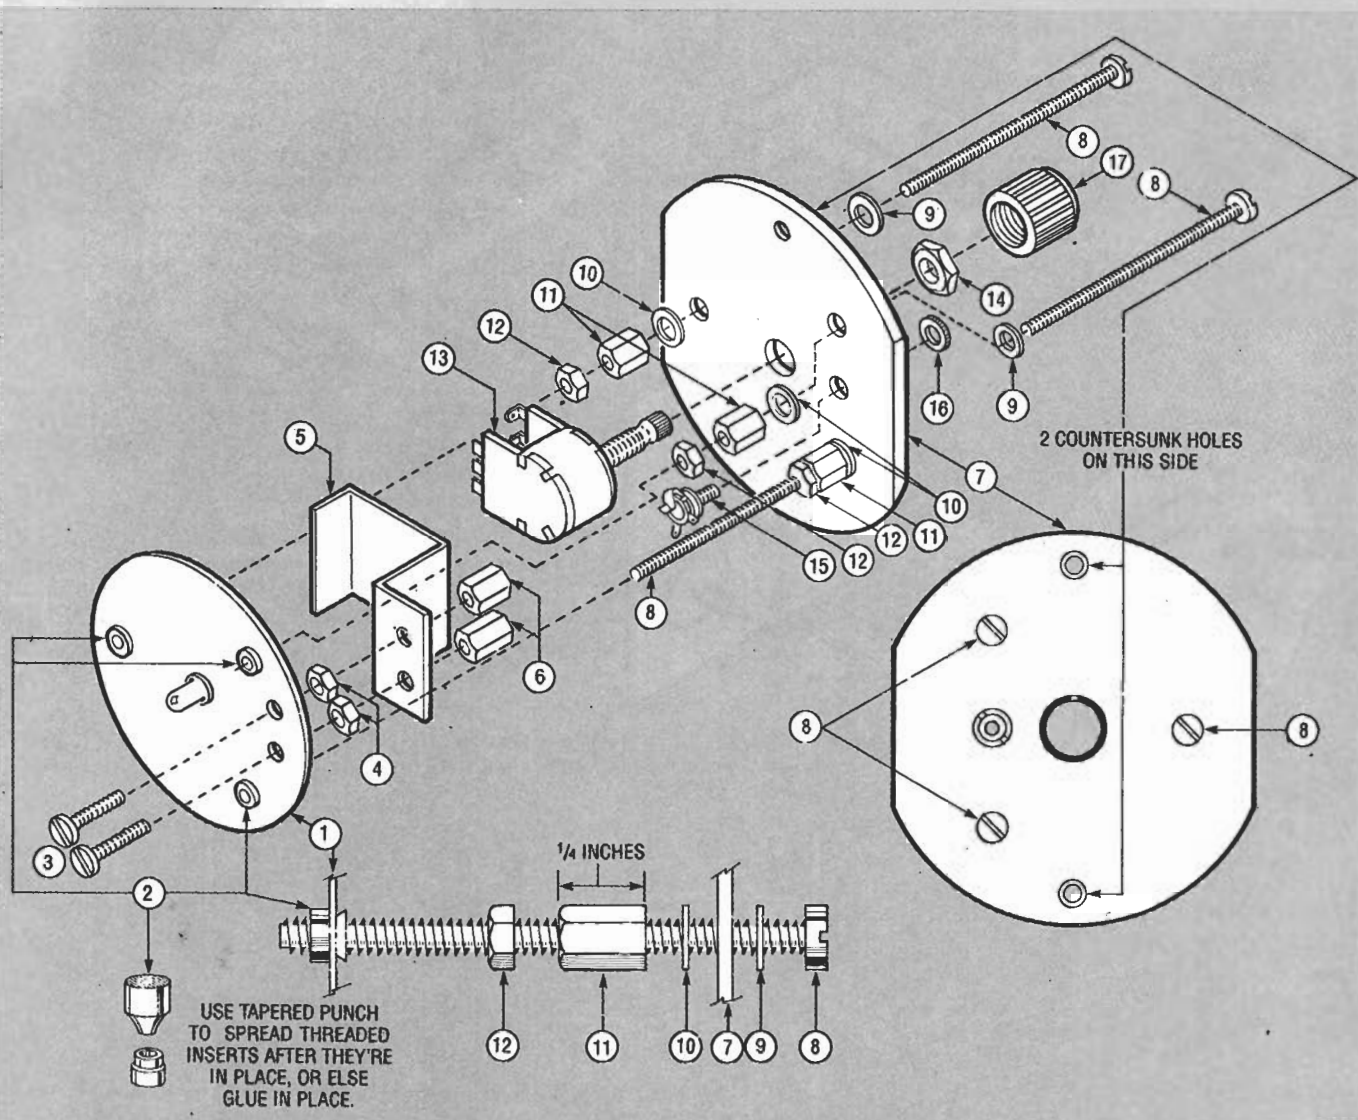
THE TRANSMITTER is assembled as shown. Look over the assembly instructions carefully before starting the project.
